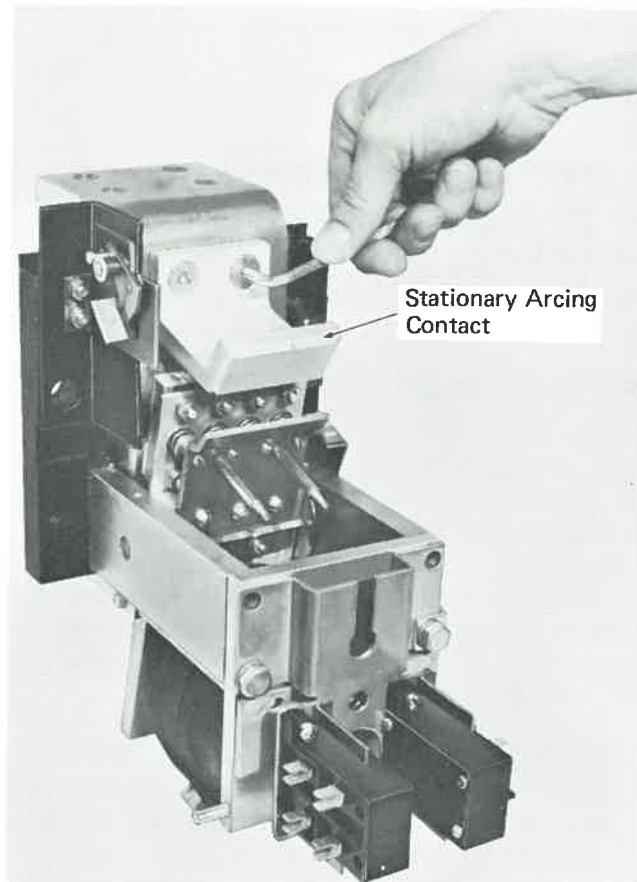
Removing Flexible Wires To Movable Arcing Contacts
